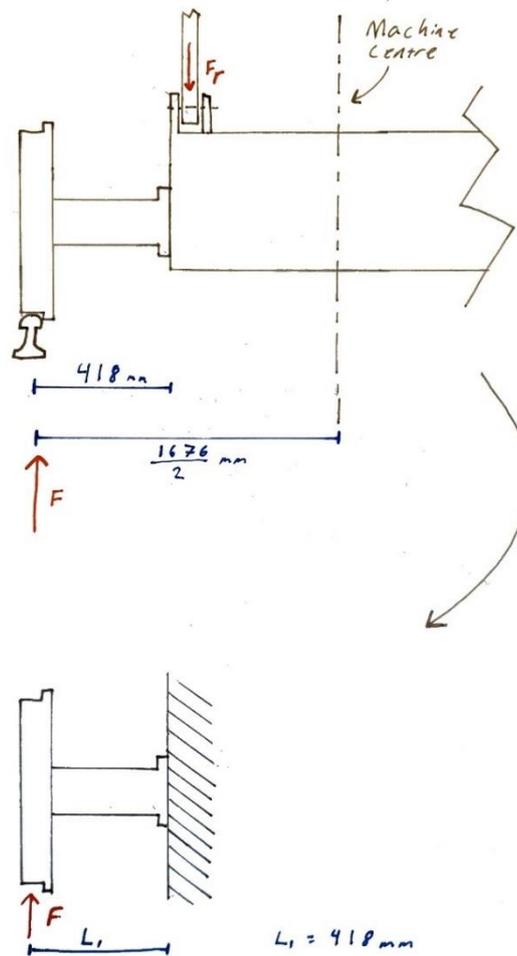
The welded center structure was assumed to be rigid due to the hydraulic cylinder on the side.
